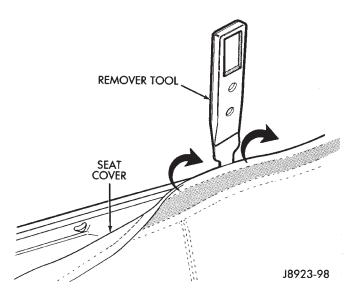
Seat Cushion Cover Retaining Clip Removal
